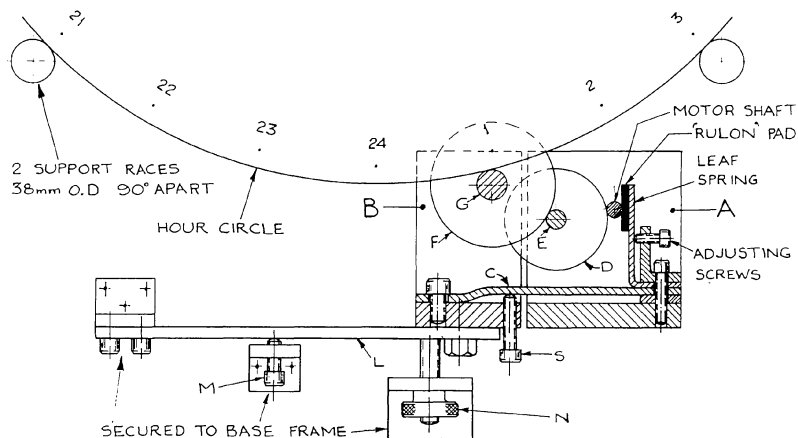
The right ascension gearless-reduction drive. The declination drive box is identical, but mounting slightly differently. The reduction given by each box is 144:1, measured from the stepper motor drive-shaft to roller G.
